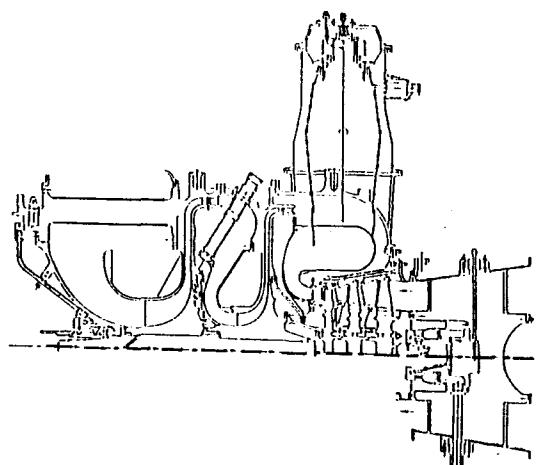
Layout of MW Class Developing Industrial Gasturbine Engine.
